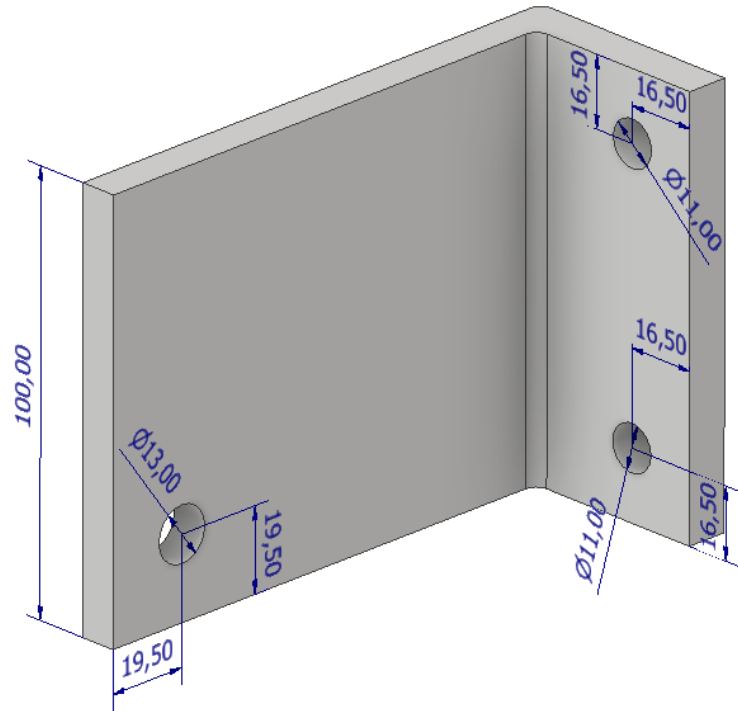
Bolt hole placement and extrusion length for large self-weight + wind L-profile. Rear bolts are size M10, front bolt is size M12. Dimensions in mm.
